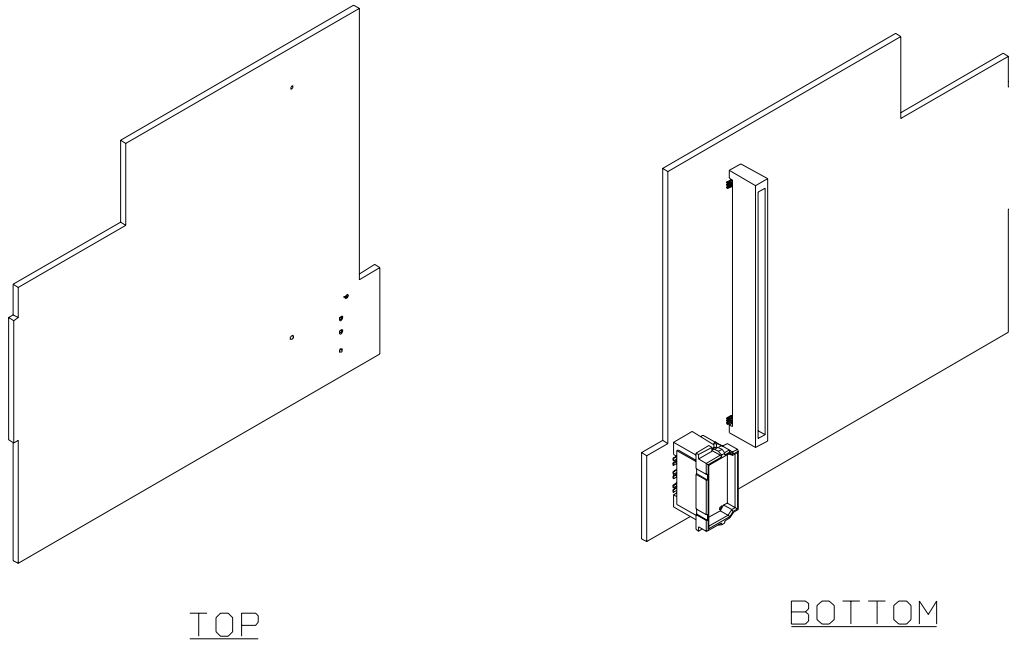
Small Form Factor I/O Expansion Card (SFF EC) – isometric views
